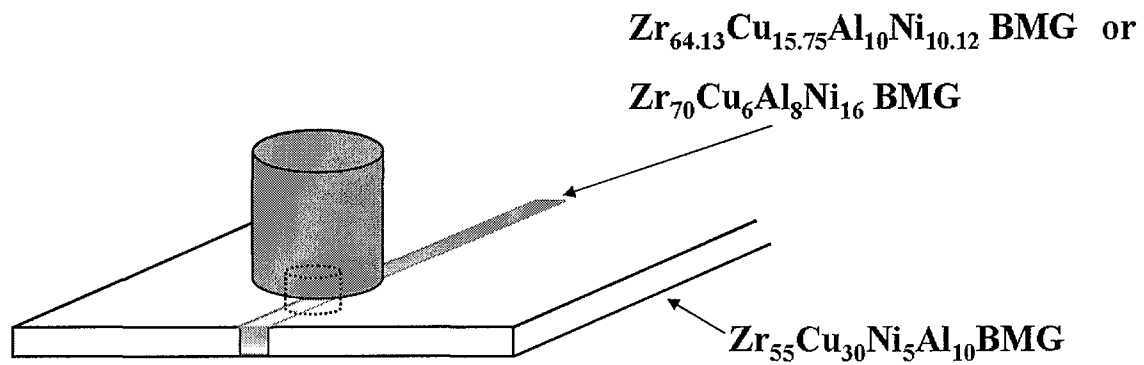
Schematic illustration of friction stir welding of BMG with dissimilar insert.
